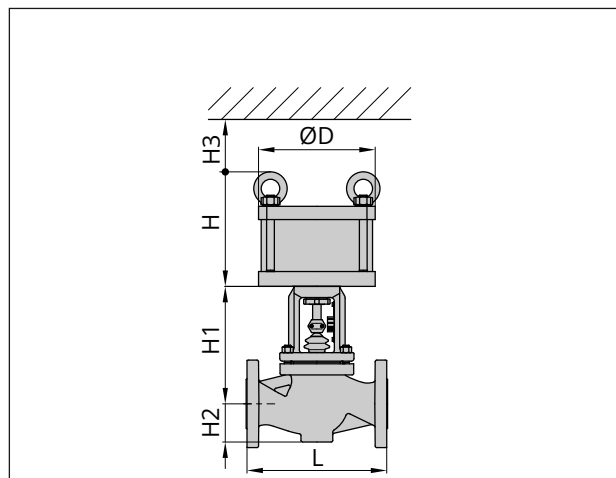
Type 3241-9 PSA, nominal sizes DN 100 to 150/NPS 4 to 6, with Type 3275A Pneumatic Piston Actuator (804 cm²)
